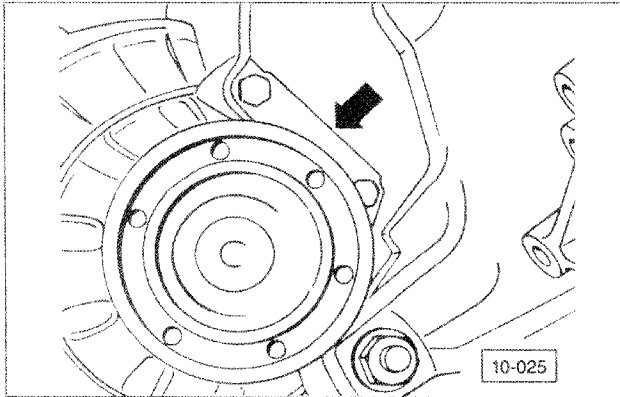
Cover plate (arrow) to be removed when separating engine and transaxle.
